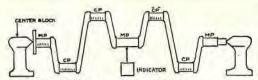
A. Method of testing a crankshaft for a bent place. (MP) are crankshaft main bearing pins; (CP) are crankshaft connecting-rod pins.
